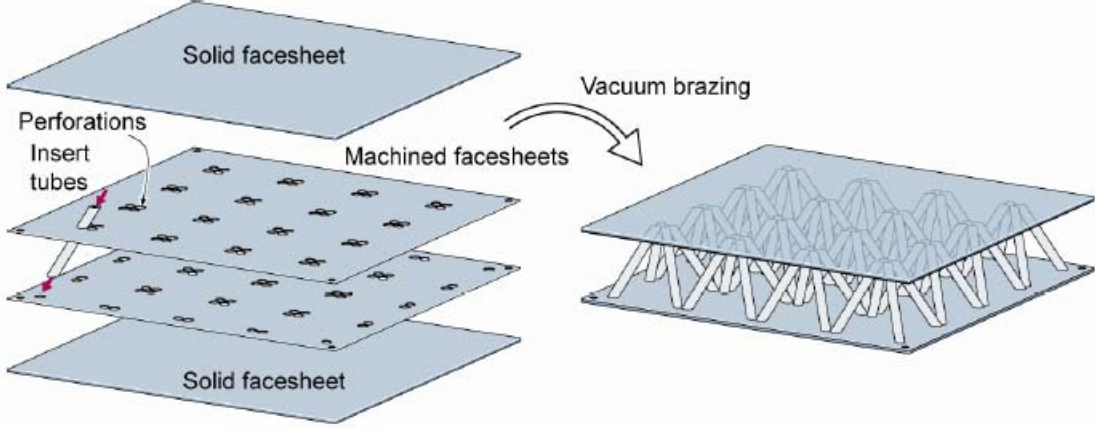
The tube insertion method. Tubes were inserted in the face sheets and the sandwich panel was assembled.
